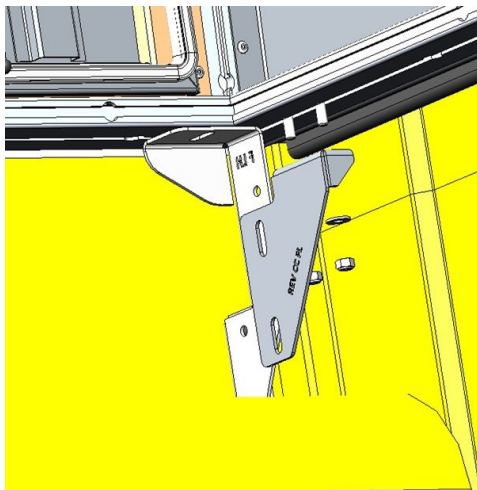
Position the Front Mounting Bracket over the inserted Hex Bolts and fasten with supplied washers and nuts
